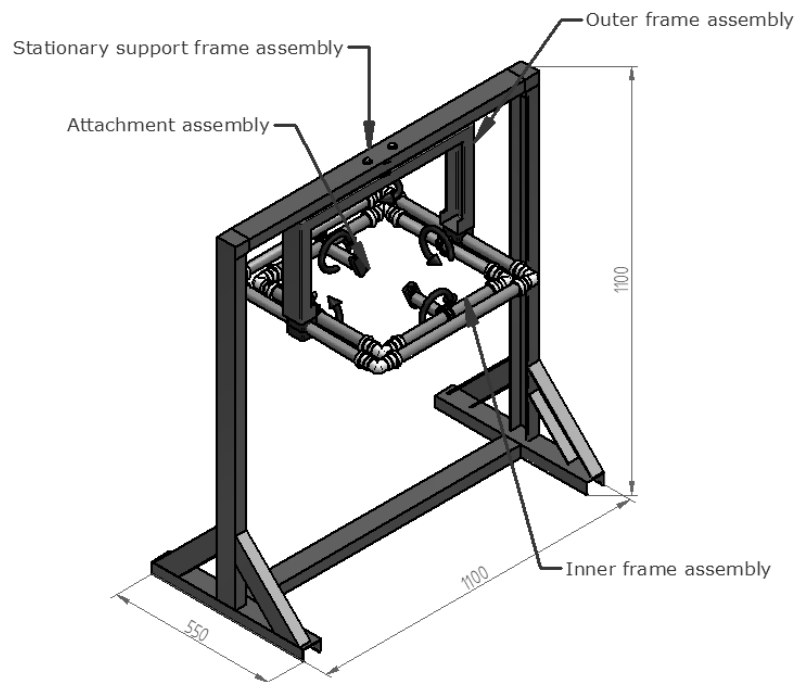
Proposed gimbal type frame with measurements, and arc arrows showing rotating joints
